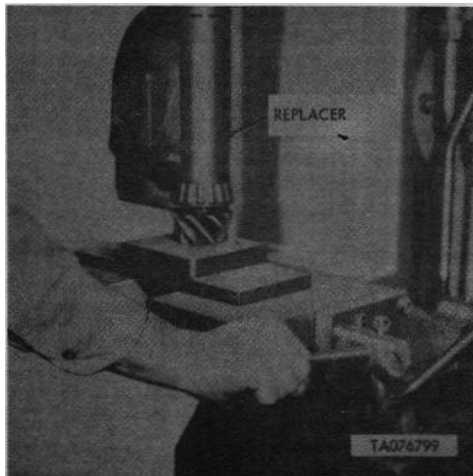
Pinion Shaft - Inner Bearing Cone Installation Using Replacer
